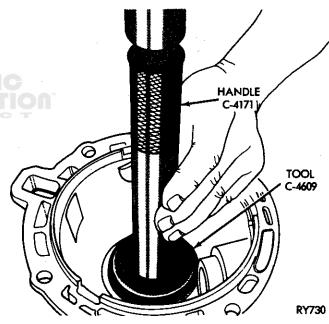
Installing Mainshaft Rear (Output) Bearing REPLACING FRONT OUTPUT SHAFT FRONT BEARING
